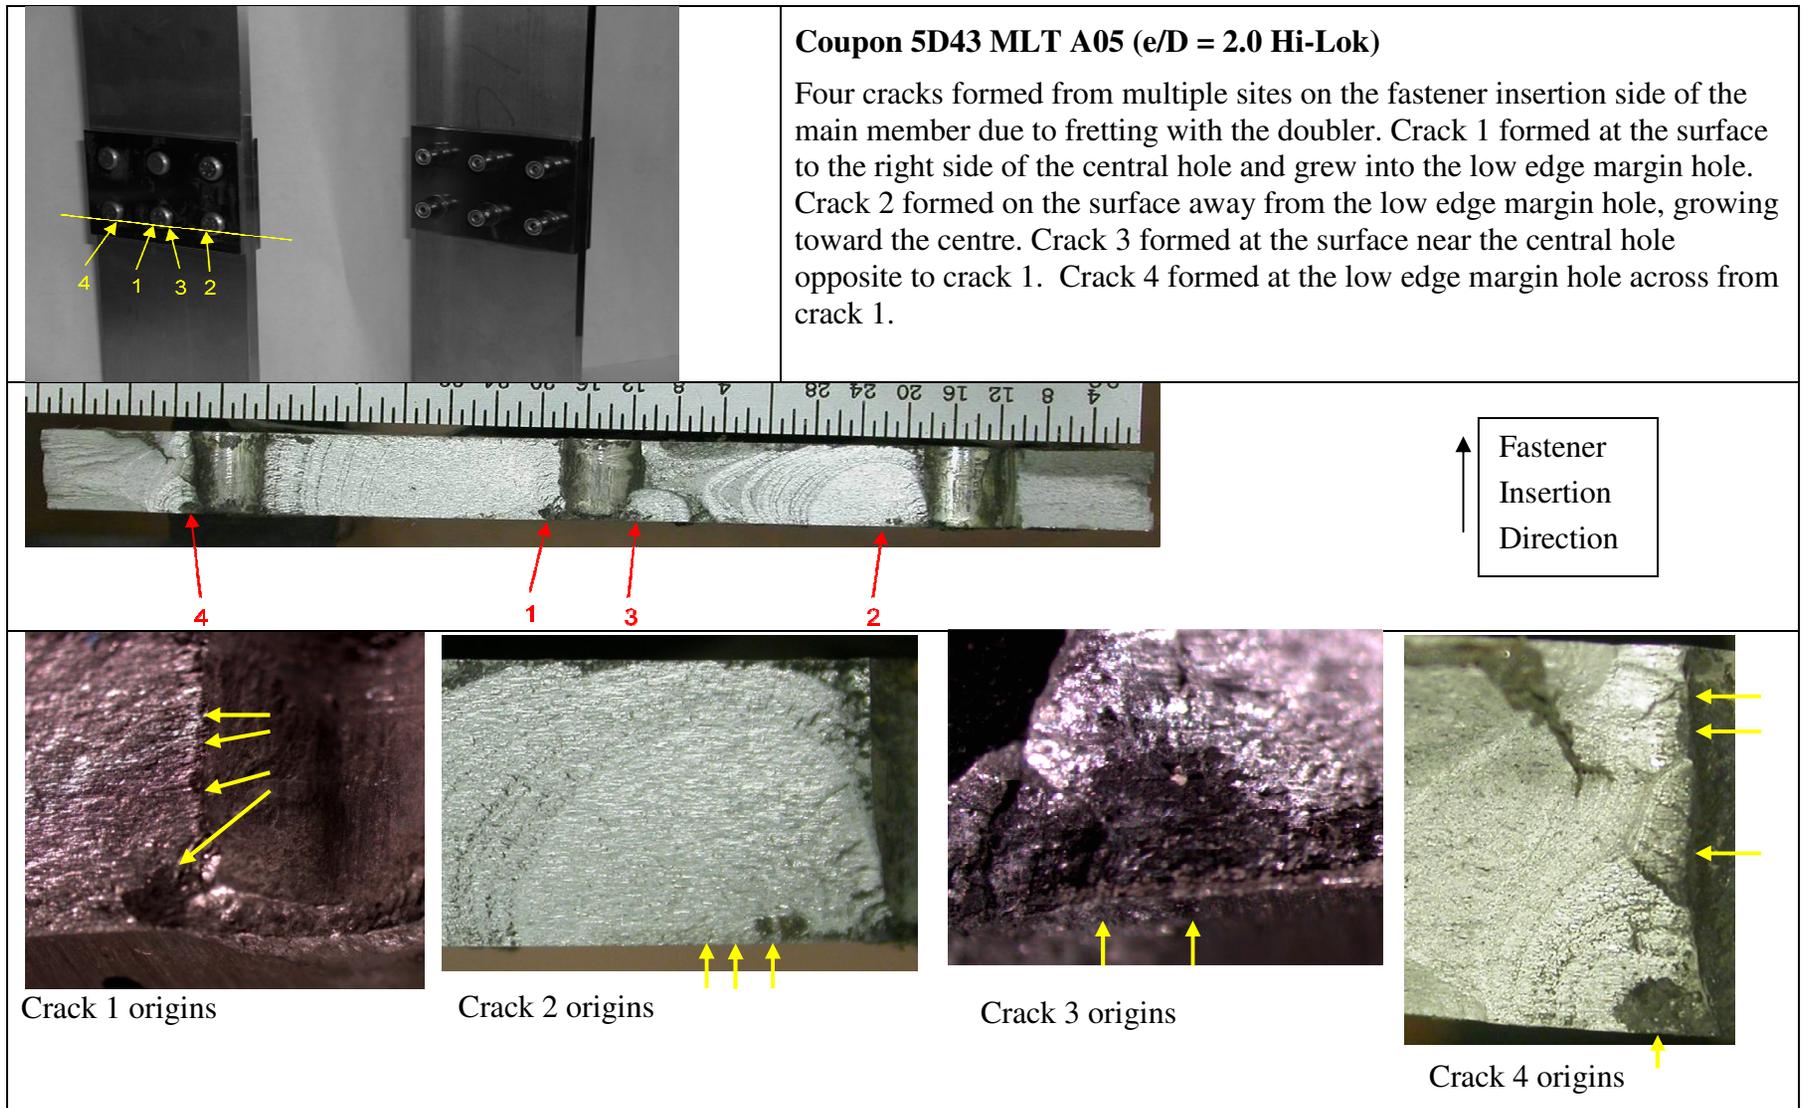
Failure surfaces of MLT test A05 with e/D = 2.0 and Hi-Lok fastener (coupon ID 5D43)
